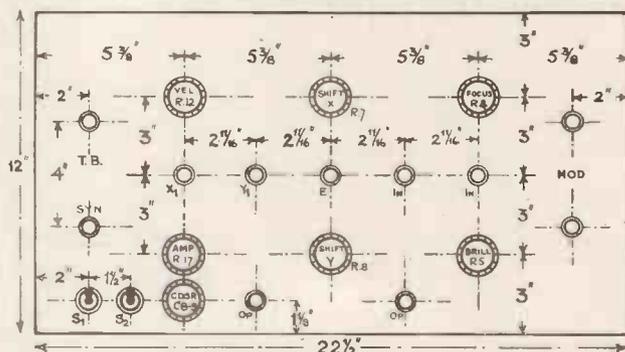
The panel is of plywood painted black which should be drilled as shown by the dimensions in this drawing.
